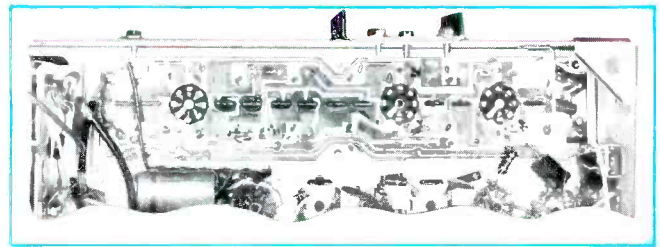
Bottom View of the RCA IF Strip Showing the Printed-Circuit Wiring.
